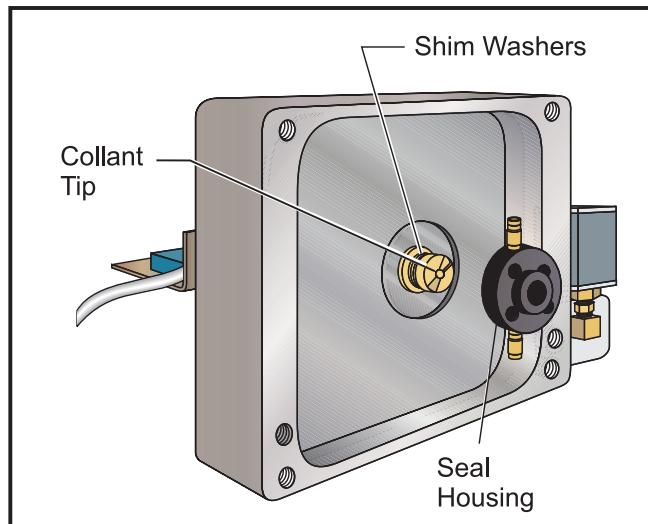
Coolant tip and seal housing (TSC machines only).
